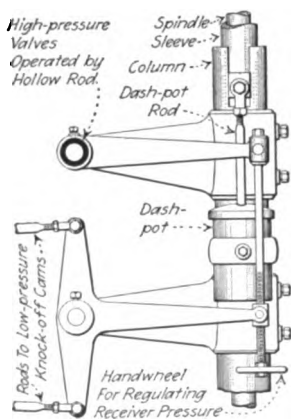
Side view of governor mechanism for the cross-compound engine of Fig. 335. This is view XX, Fig. 342.
